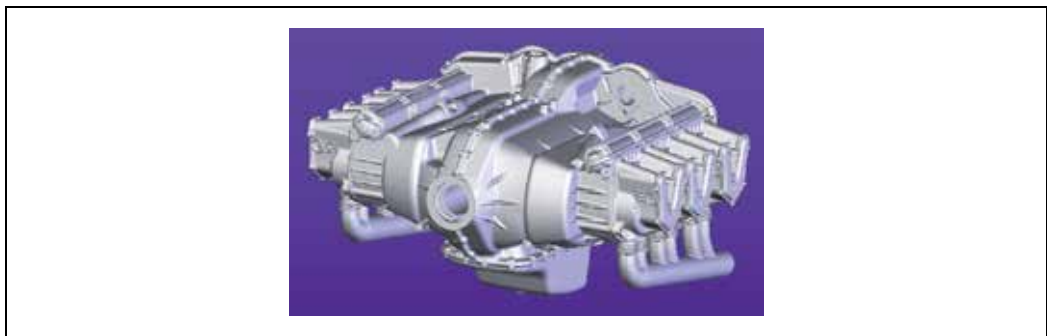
3D cad view of the 6 cylinder, two-stroke Diesel engine.
